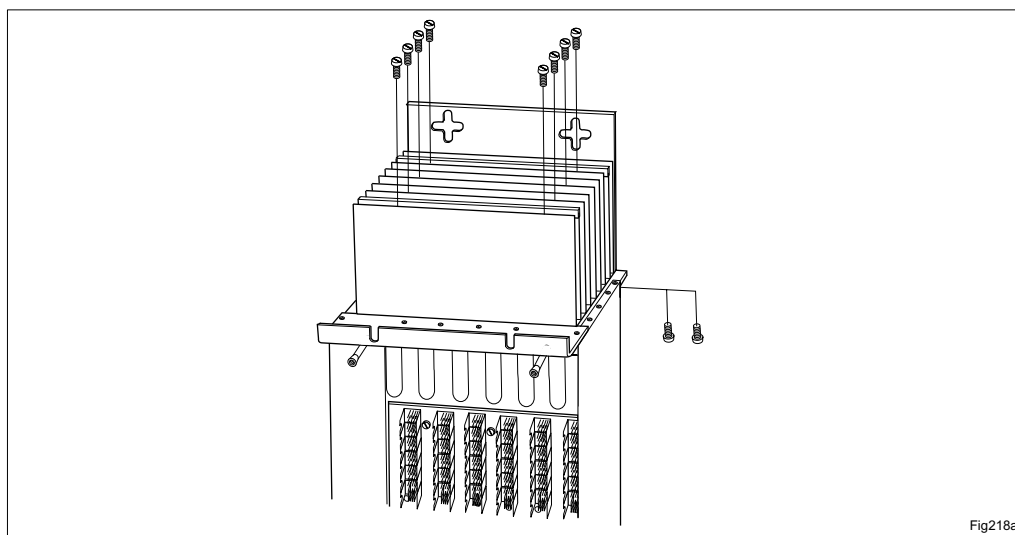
Fitting the cooling flanges to a 4U magazine.
